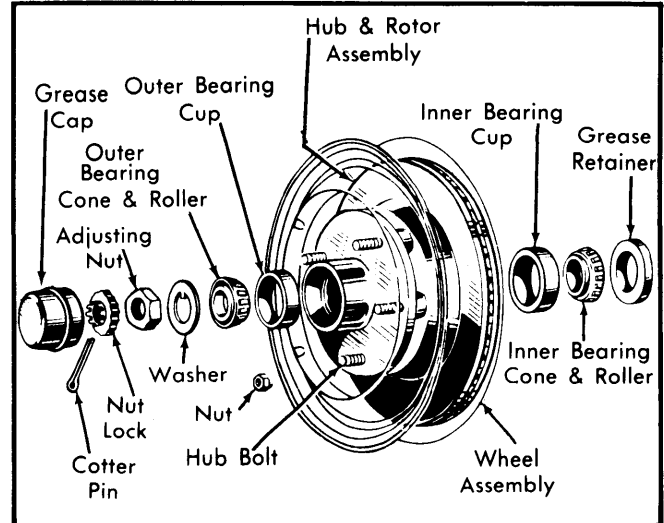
Exploded View of Wheel Bearing Components With Disc Brakes
